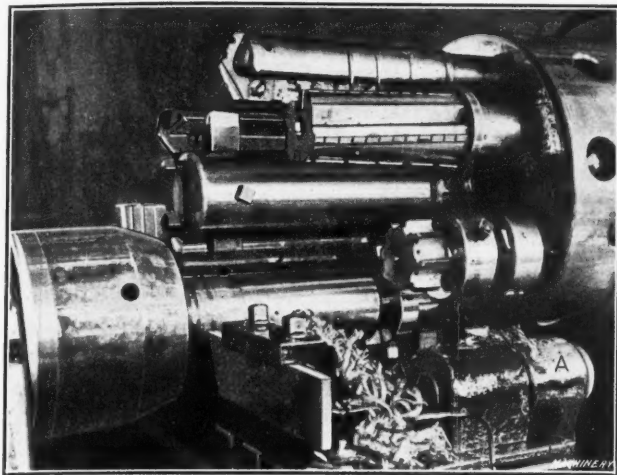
Cleveland 3 1/4-inch Automatic Screw Machine set up for making a Shrapnel Case in Twenty-five Minutes
